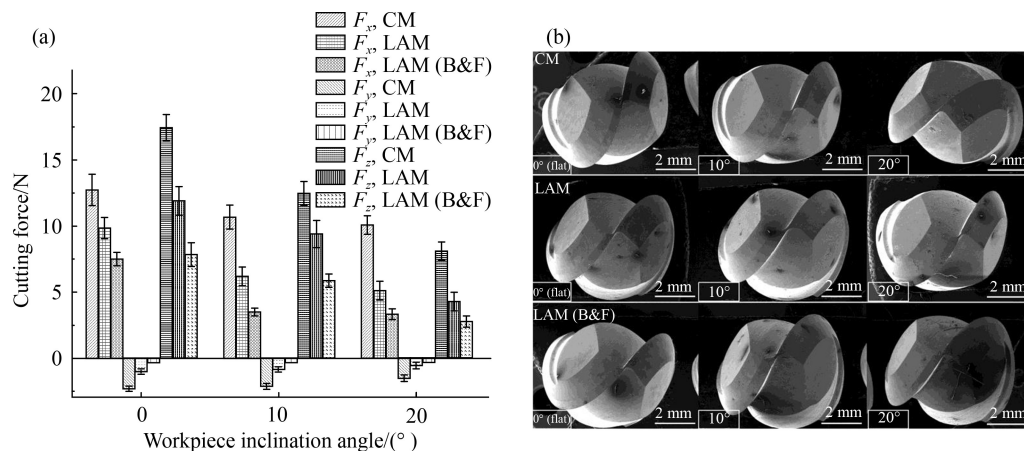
The influence of workpiece inclination angles on cutting force and tool damage: (a) workpiece inclination and cutting force and (b) workpiece inclination and tool damage [151]. CM: conventional milling; LAM: laser-assisted milling. Reproduced with permission from Ref. [151] from Springer Nature.
